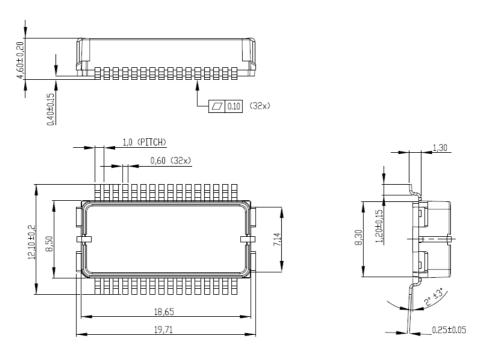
SCC1300 package outline and dimensions. All tolerances are according to ISO2768-f (see table in the below) unless otherwise specified.
